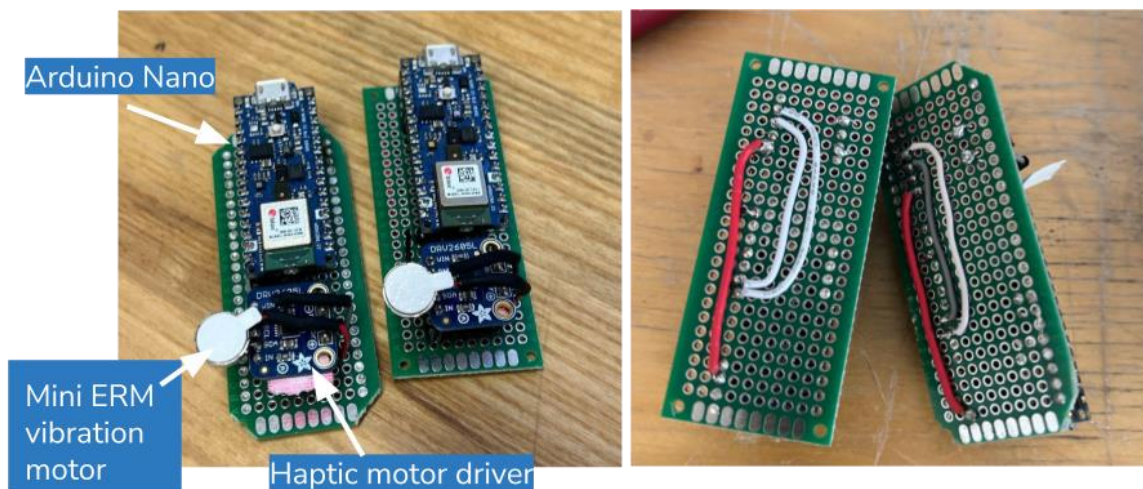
Internal components of Prototype 1 and 2: top view (left) and bottom view (right).
